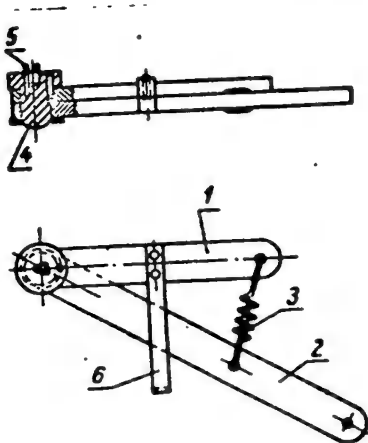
Device for Checking the Strength of the Shrink Fit of the Rotor Axle Housing
